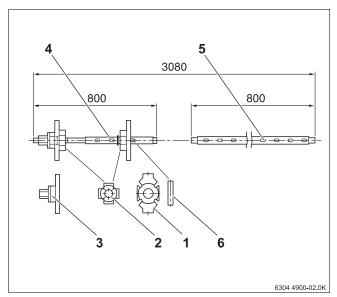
Boiler compression tool size 2.3 (dimensions in mm)
